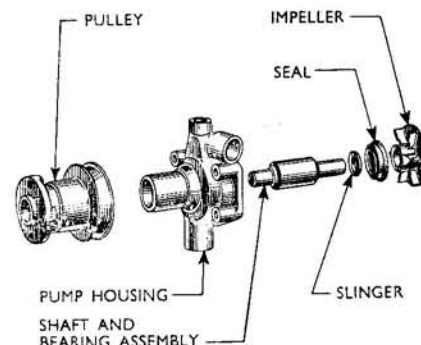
Exploded view of water pump used on Fordson Dexta tractor.
